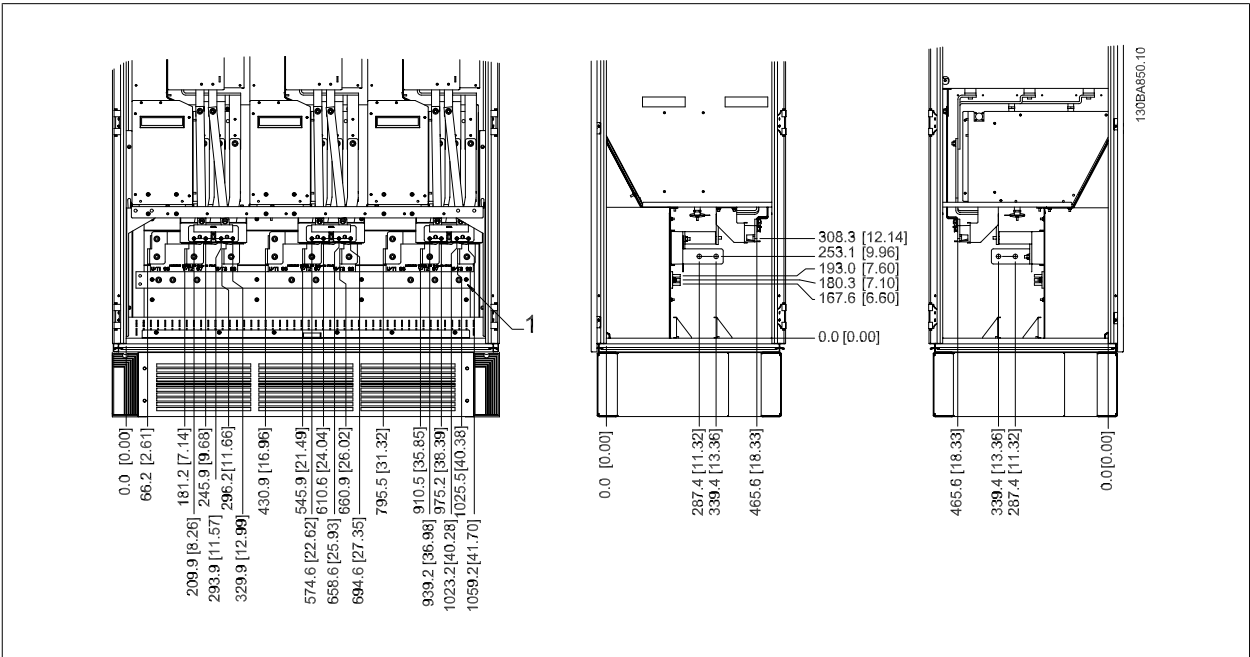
Terminal locations - Inverter Cabinet - F2 and F4 (front, left and right side view)
